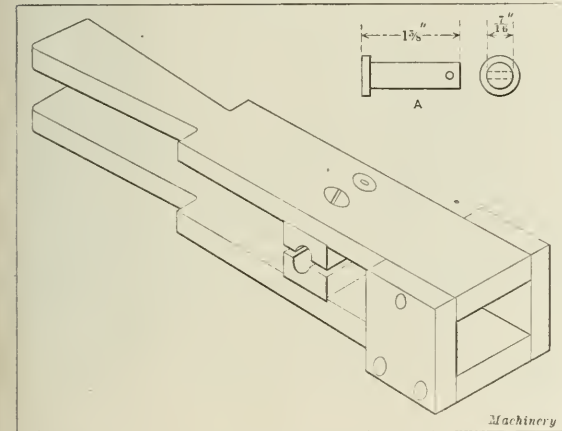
More Costly Form of Jig than that shown in Fig. 3 for drilling Cotter-pin Hole
